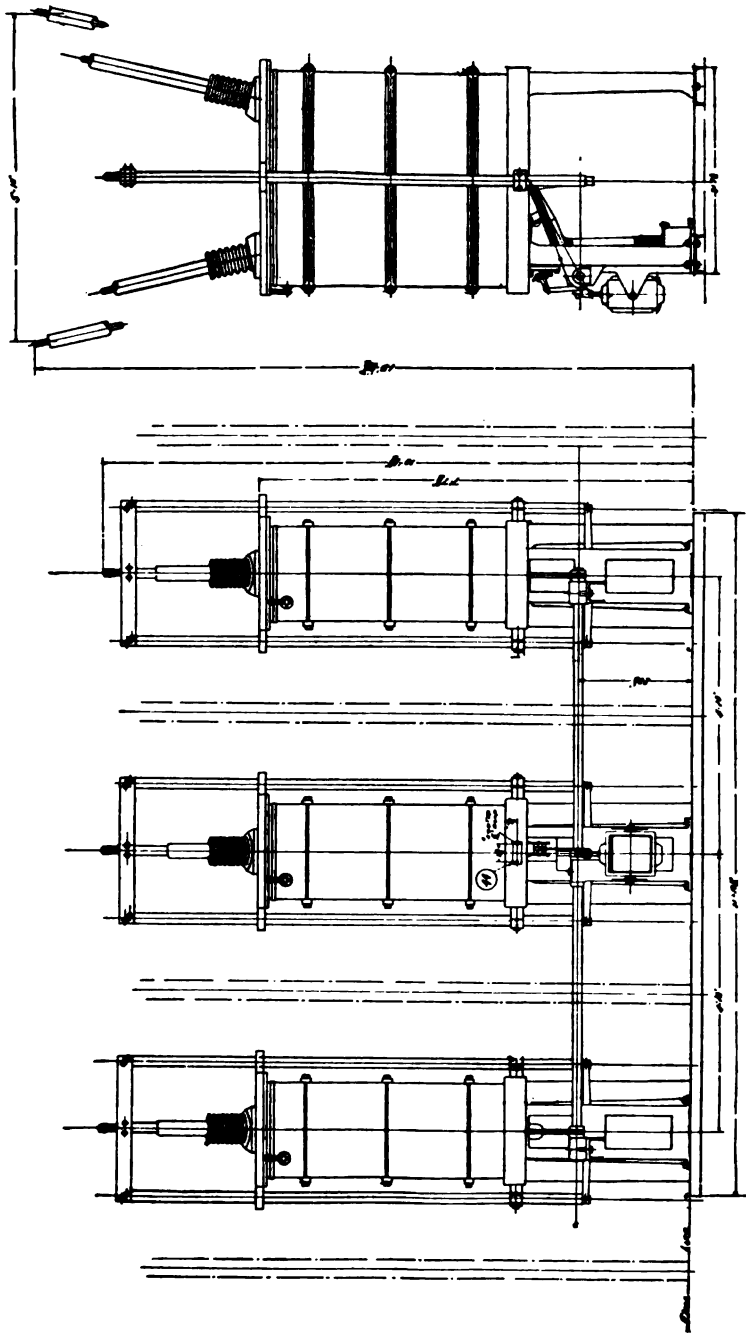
88,000-volt top-connected breaker with sheet-metal tanks
